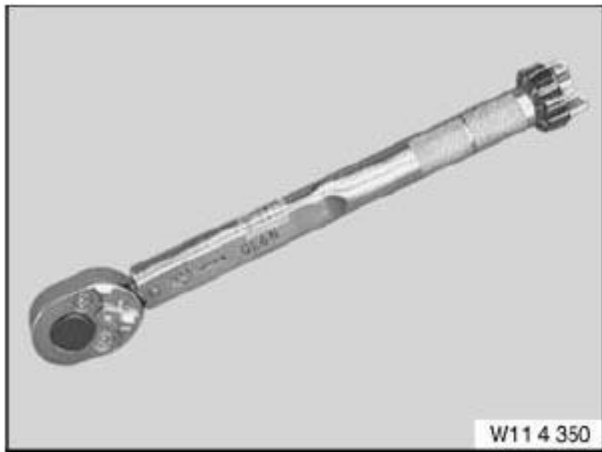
Identifying Special Tools 11 8 553 With Special Tool 11 4 350
